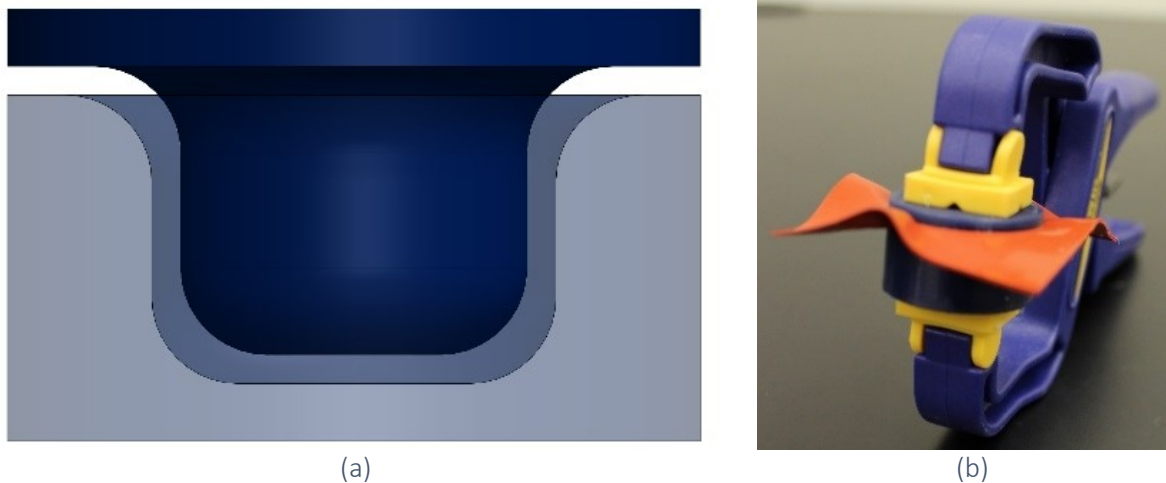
Silicone mould (a) designed, and (b) manufactured and clamped over silicone sheet
